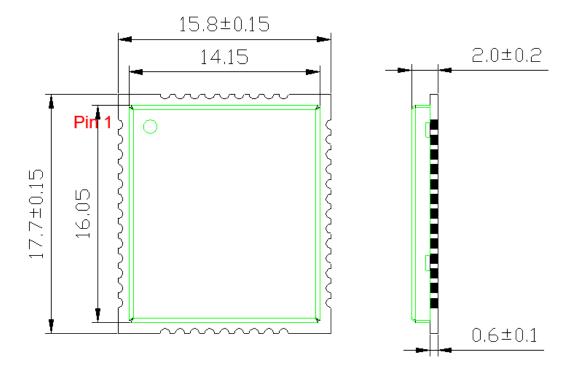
BC66 Top and Side Dimensions (Unit: mm)
